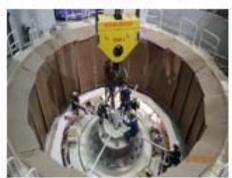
Run-out Check for Coupling Main Shaft and Lower Shaft for Unit 2
